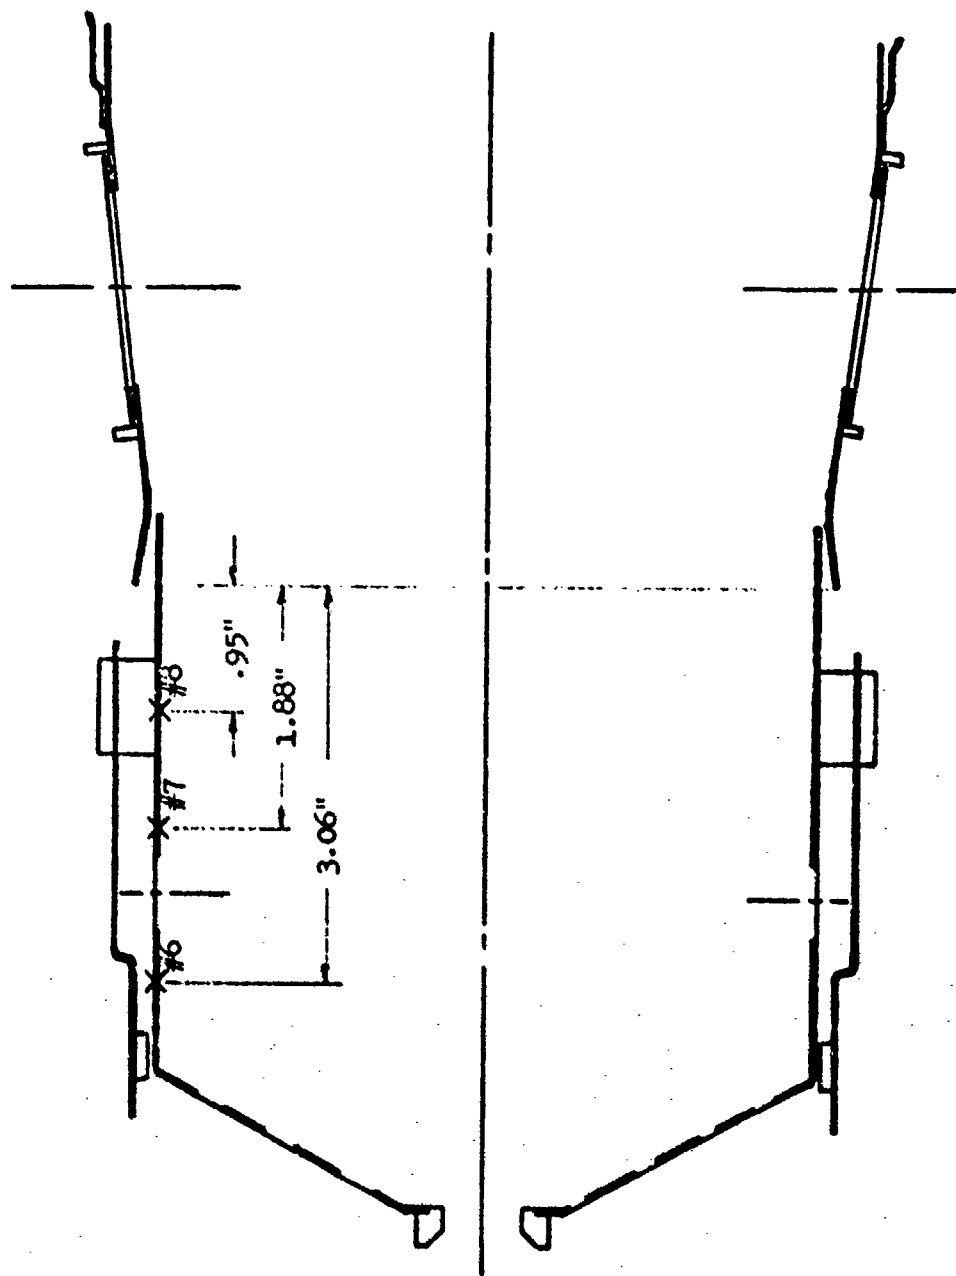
Final Design Modified Conventional Combustor Skin Thermocouple Locations.
